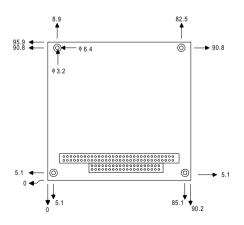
PC/104 module dimensions (mm) (±0.1)
